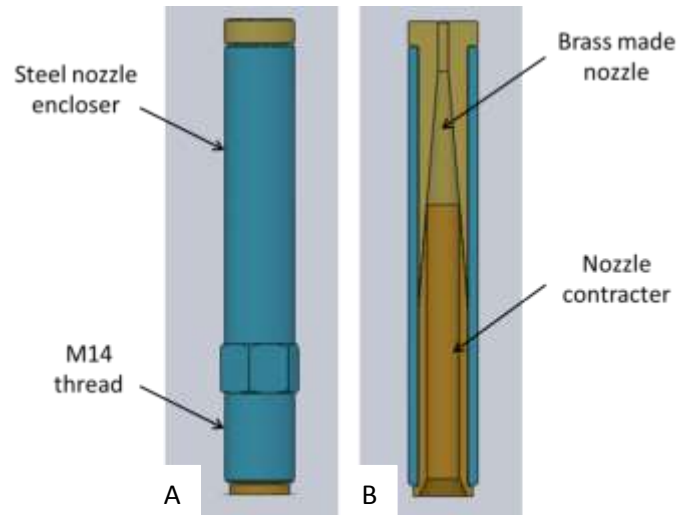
Nozzle design of the Dual-nozzle cryogenic cooling system. A) Front view, B) section view
